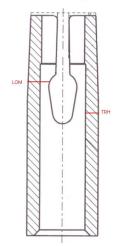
Drawing of collet with emphasized fracture and crack
